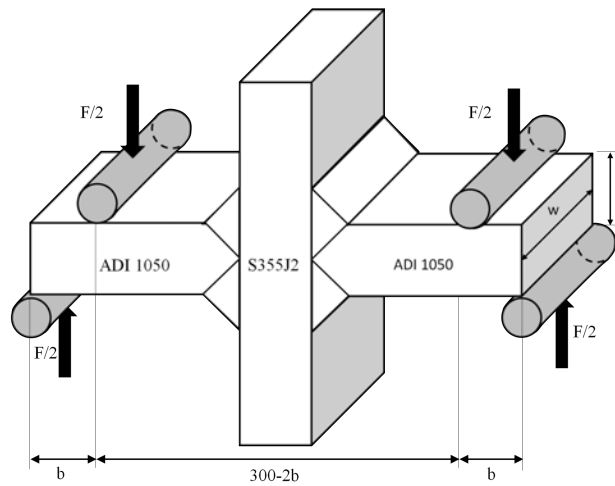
Geometry of the cruciform full-penetration K-butt-welded joints under bending load
